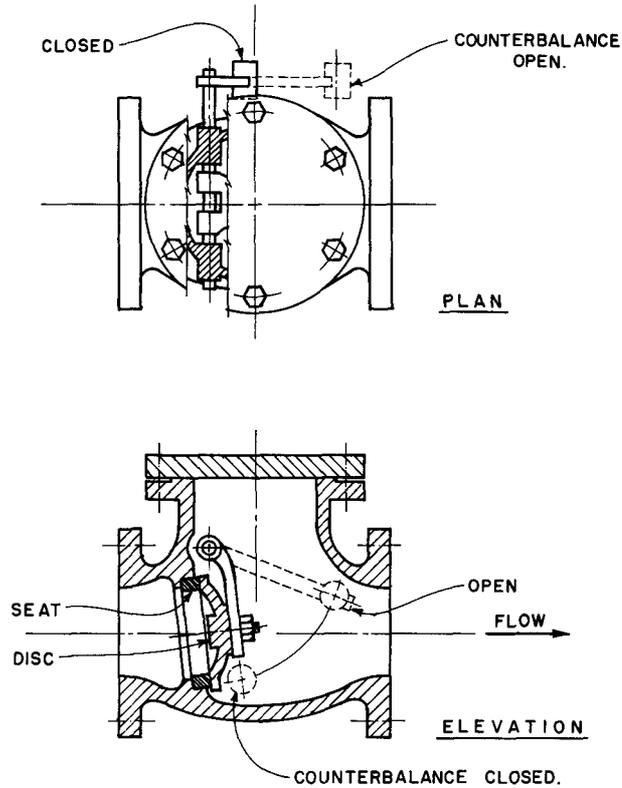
Check Valve With Outside Counterbalancing Weight.
